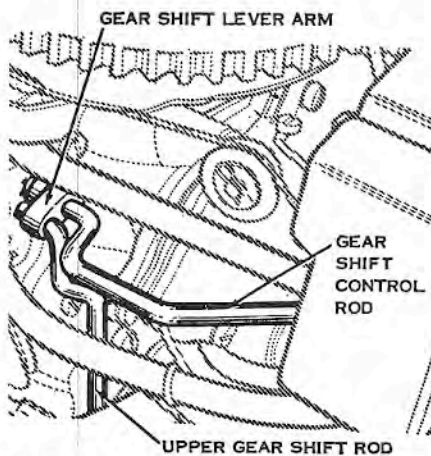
Adjust the gear shift rod on early models until the gear shift control rod is horizontal in the neutral position.
